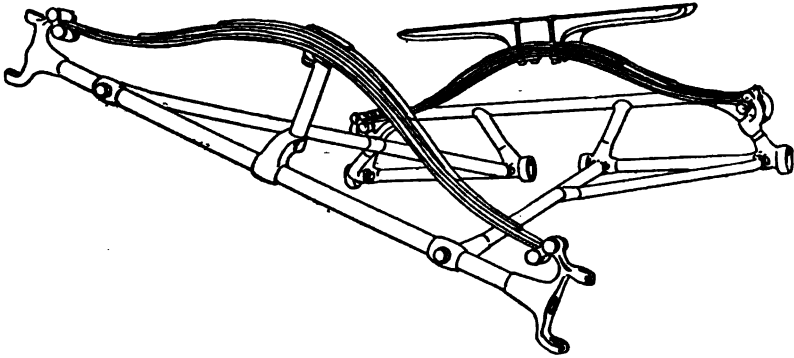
The Flexible Underframe of the Reading Steam Carriage.
